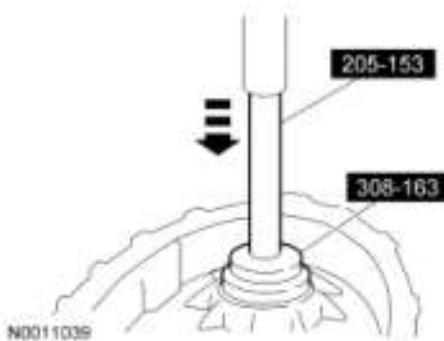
Using Special Tools To Press Front Output Shaft Support Bearing Into Case
